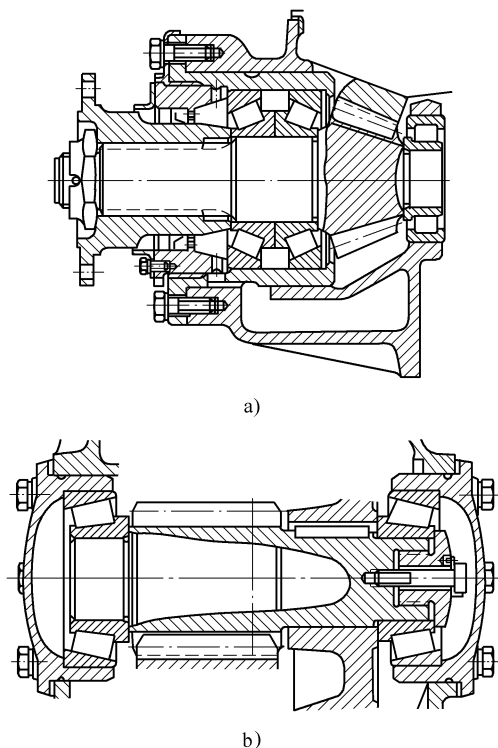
Bearing clearance adjustment of face-to face mounting
